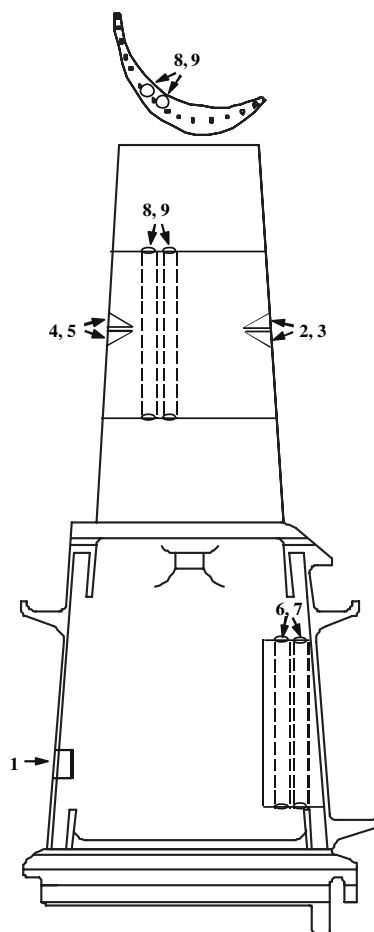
The blade section plan. 1—shank section 25 mm \times 20 mm; 2, 3—leading edge sections 25 mm long; 4, 5—trailing edge sections 25 mm long; 6, 7—cylinder bars from the shank for the stress-rupture tests specimens; 8, 9—cylinder bars from the airfoil for the stress-rupture tests specimens
